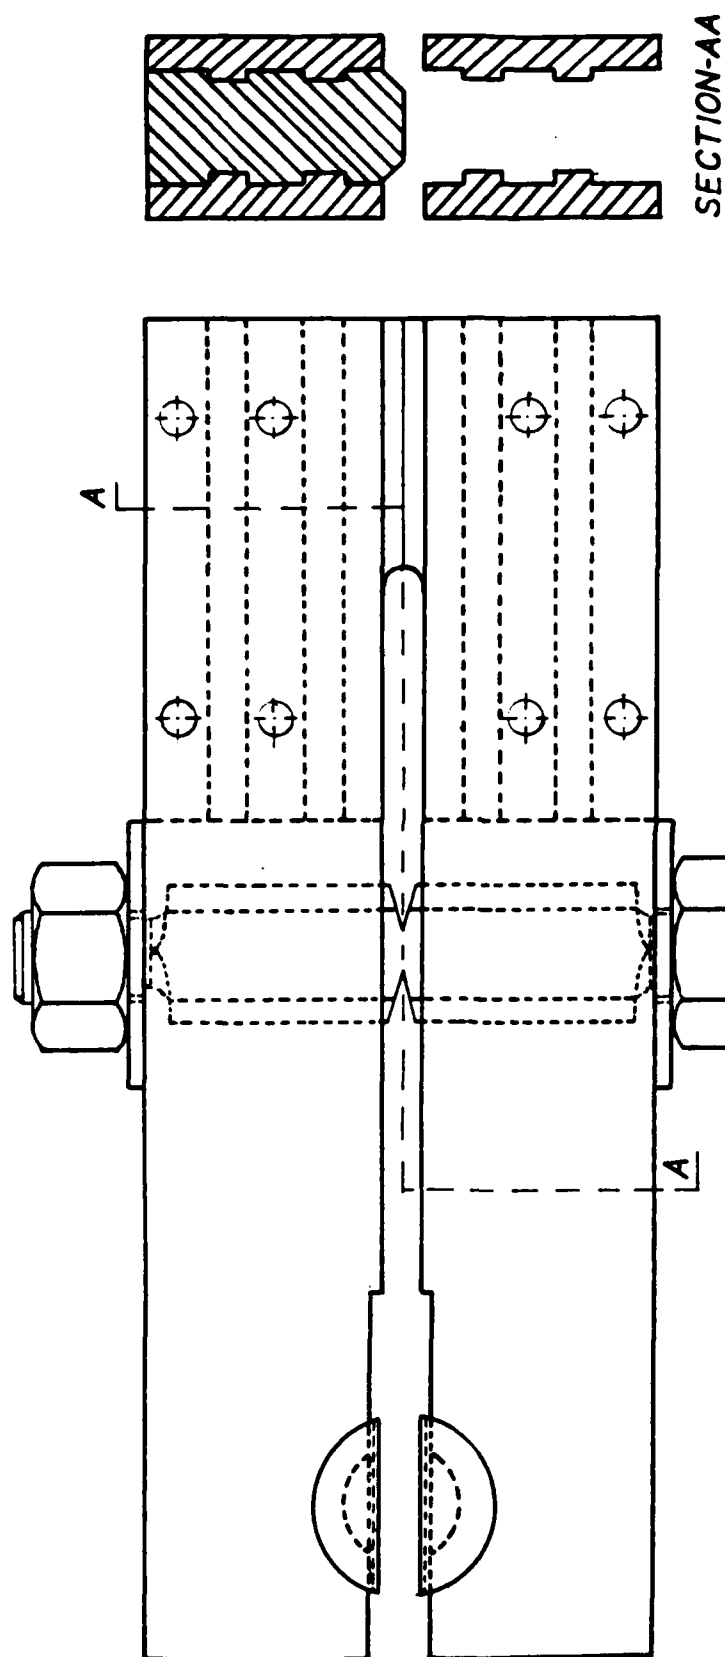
Fast fracture loading device assembly (drawing is not to scale)
